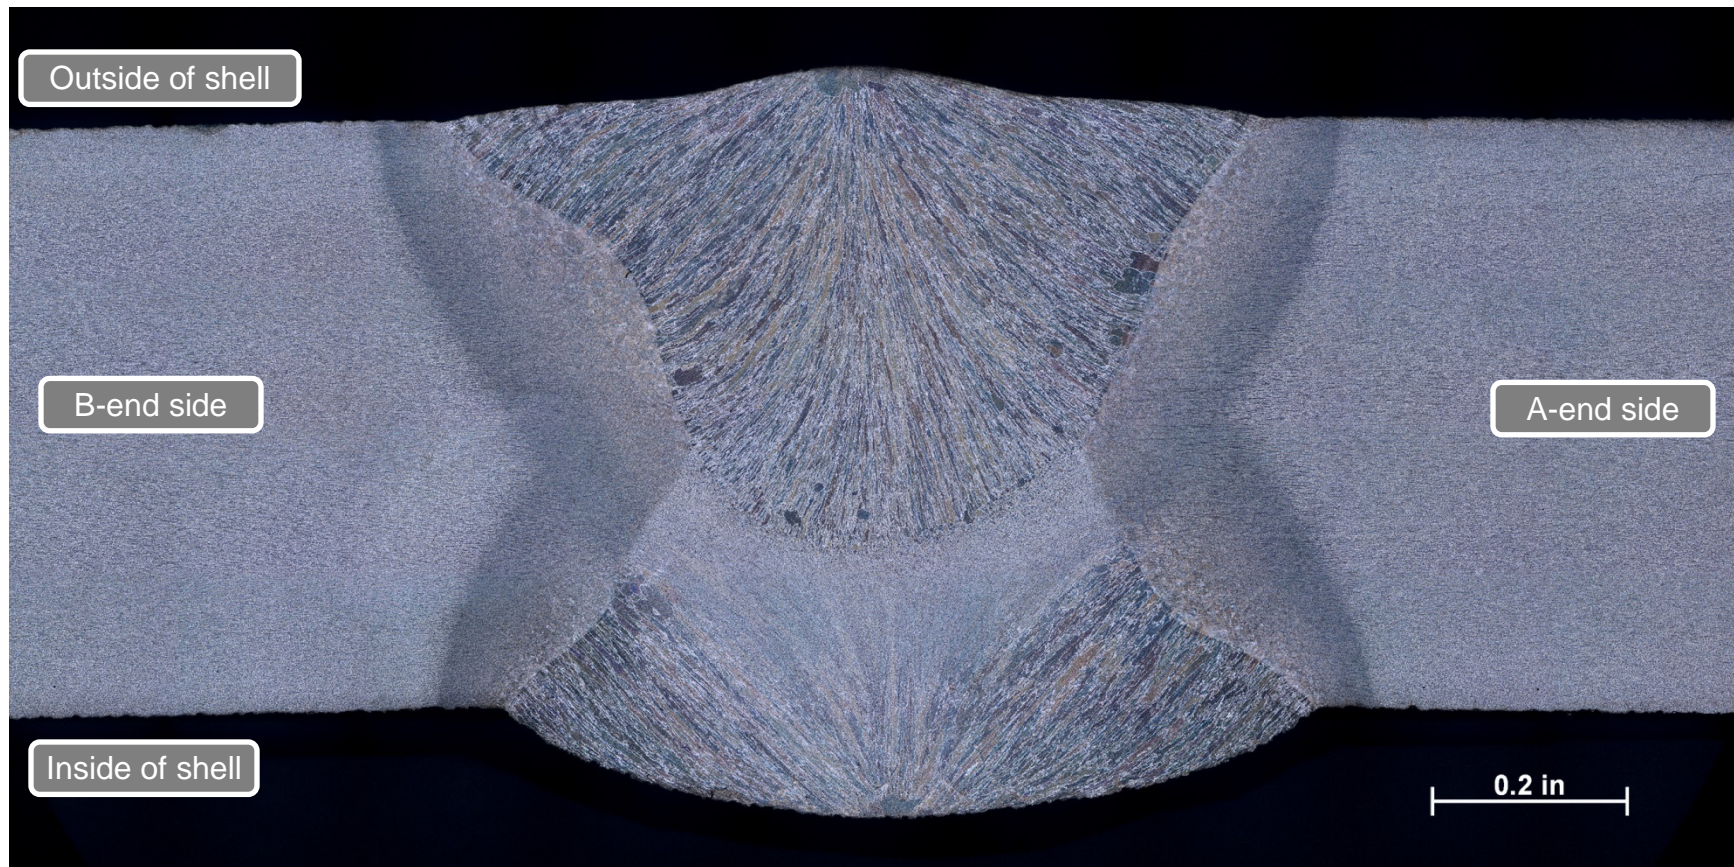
Metallographic cross section of the circumferential DSAW weld from the undamaged tank car section.
